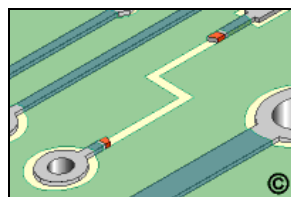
Scrape off any solder mask or coating from the ends of the remaining circuits.
